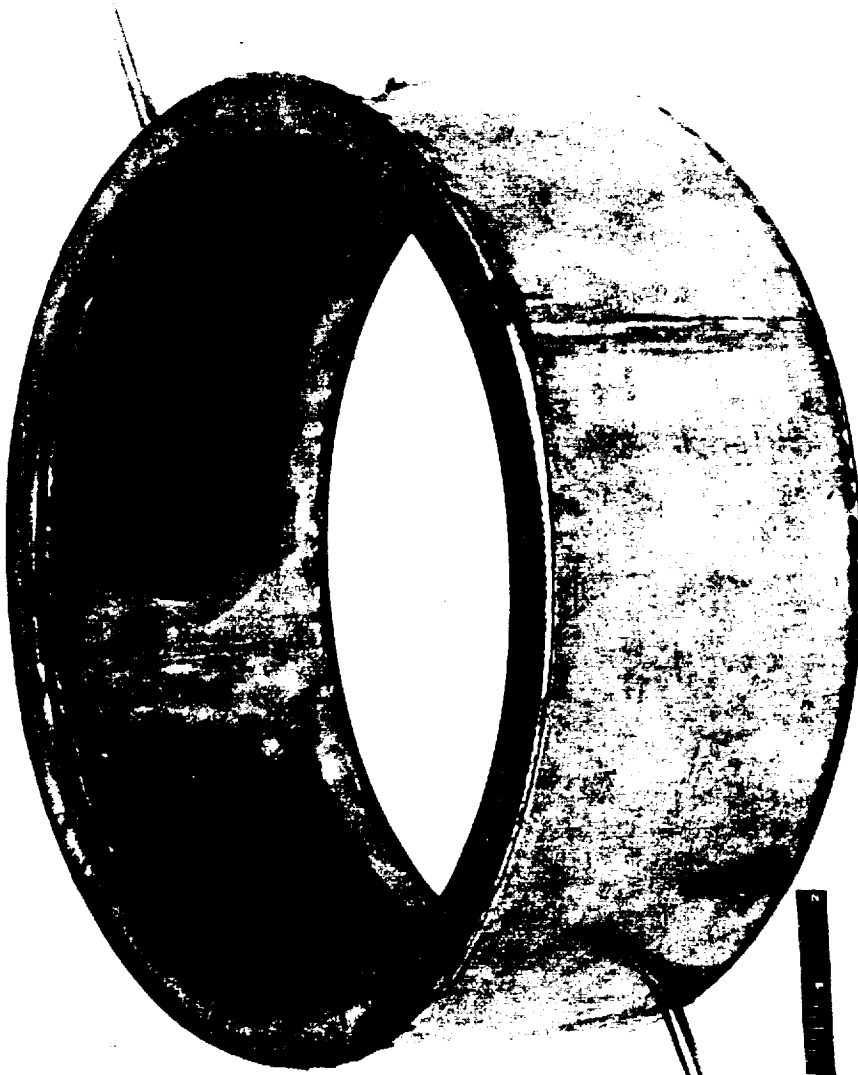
Cylindrical Bag-Braze Sample Assembly
